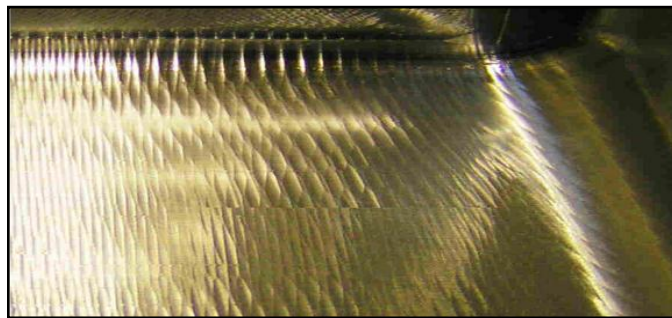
Poor surface finish of the product caused by the chatter of machining
